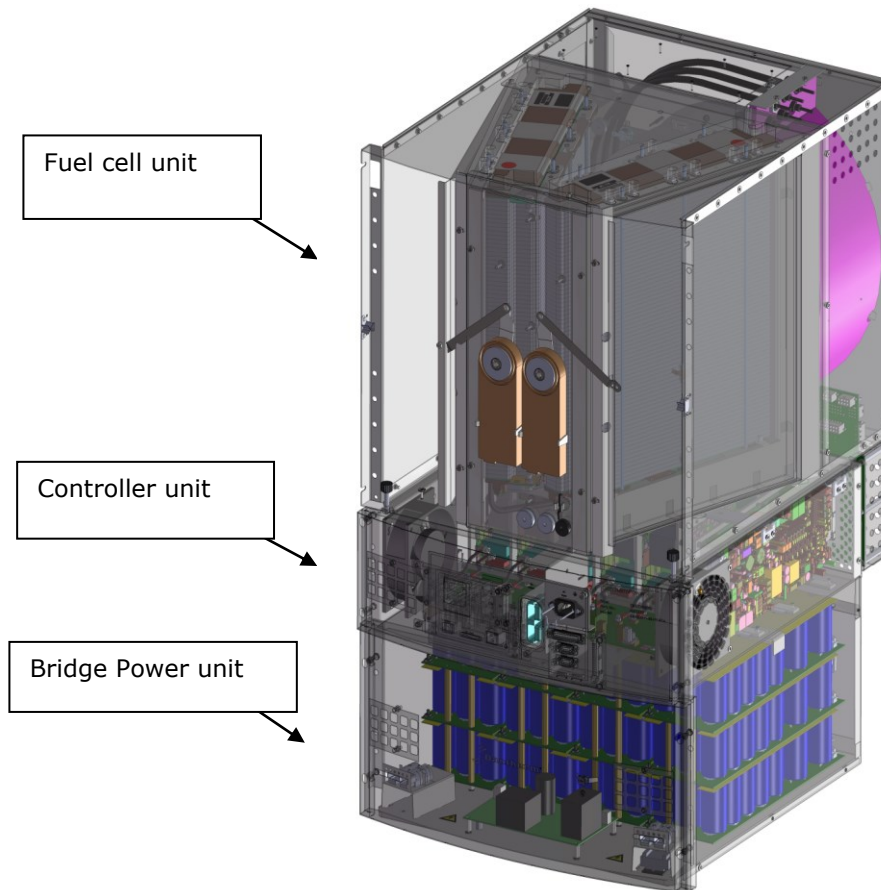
Exploded view of complete 5kW fuel cell system. The three most expensive components.
